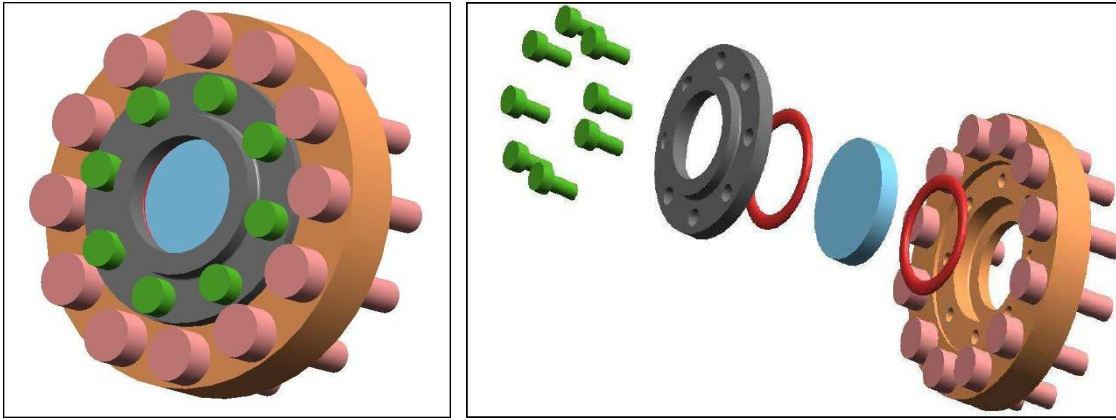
CAD drawing of an optical window prototype and its explosion view. Drawings provided by Carlo Gavacci Space
